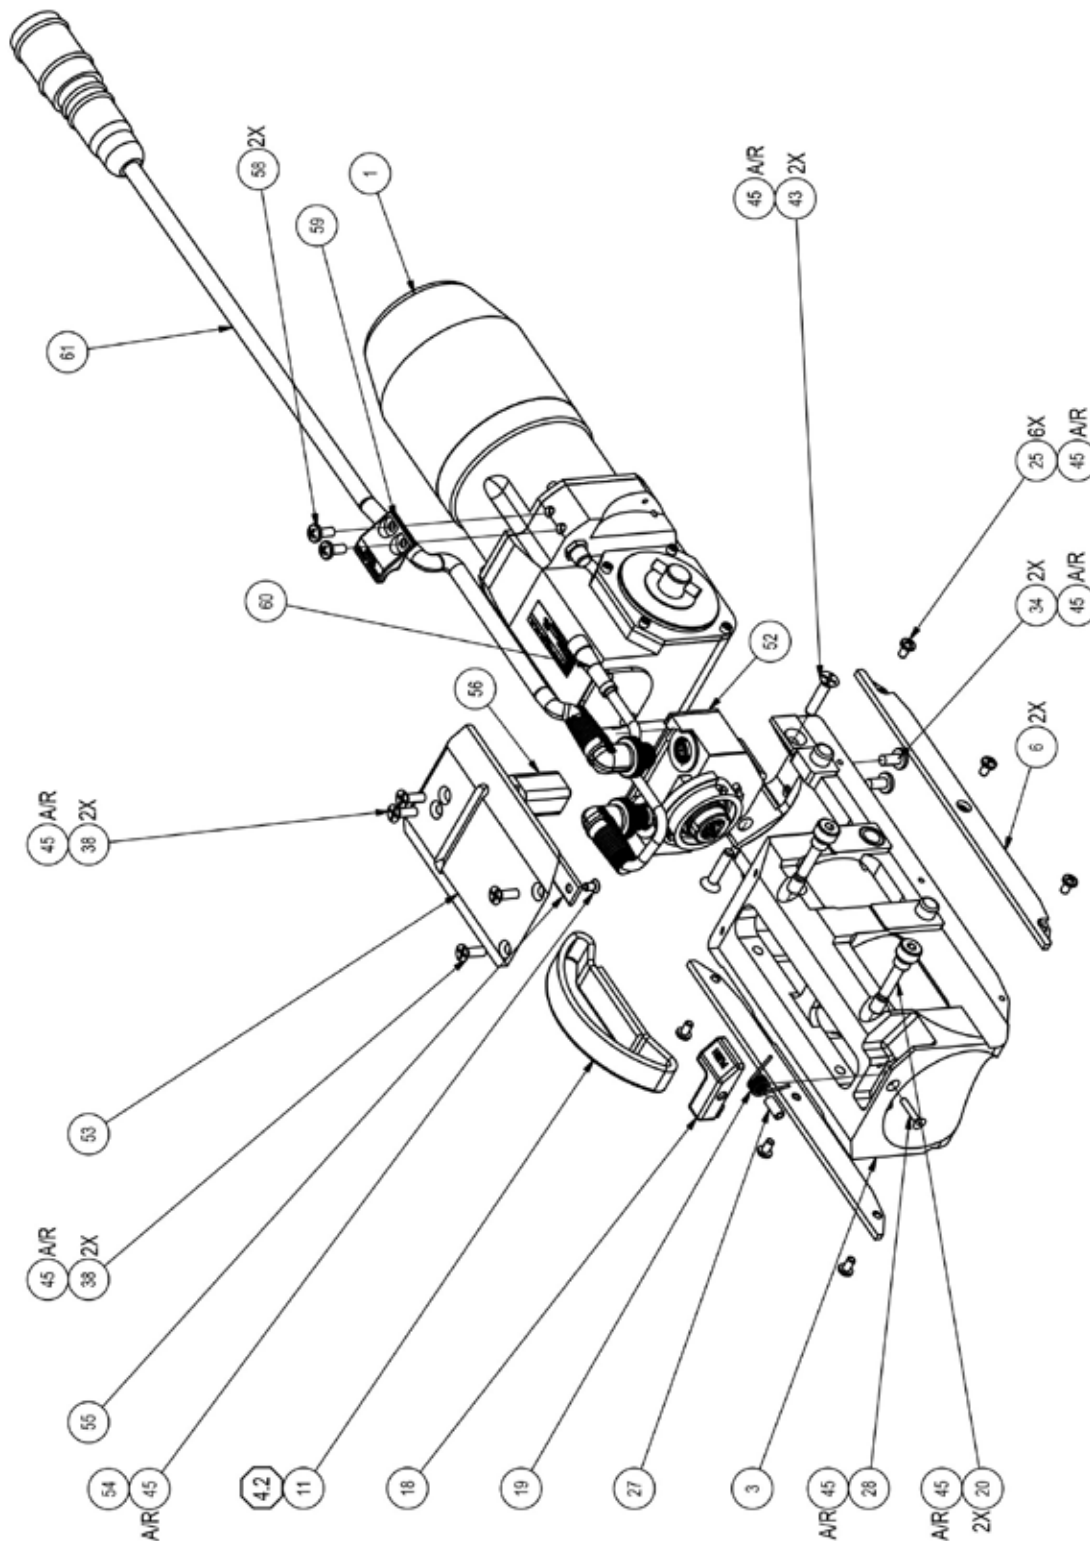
Transporter Assembly, Ultra Shorty III, TX360
